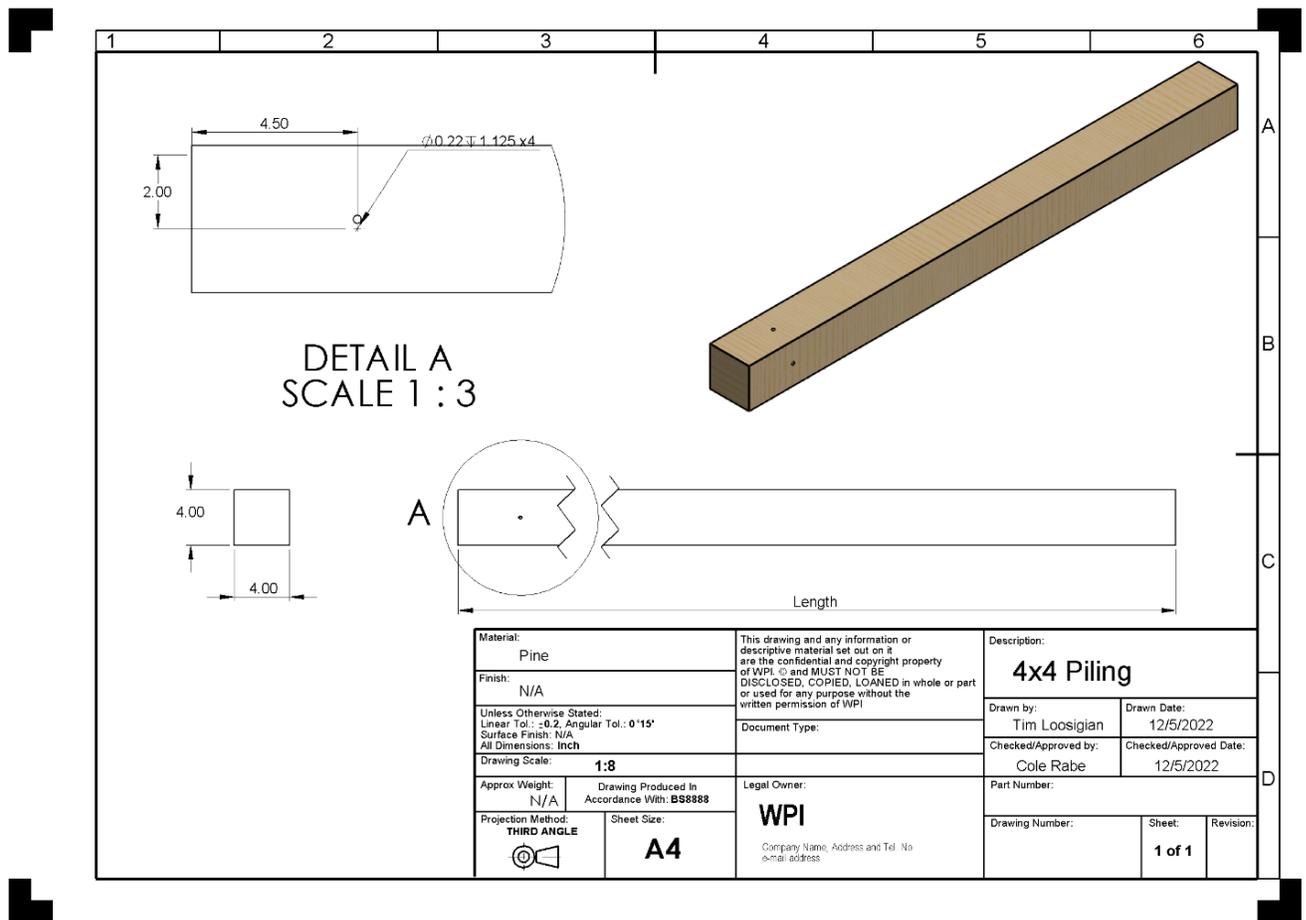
Technical drawing of the 3D modeled piling with predrilled holes
